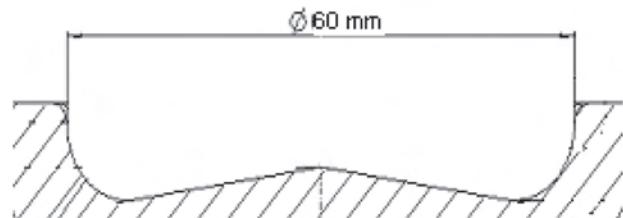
Piston bowl geometry C, with a piston bowl diameter of 60 mm
